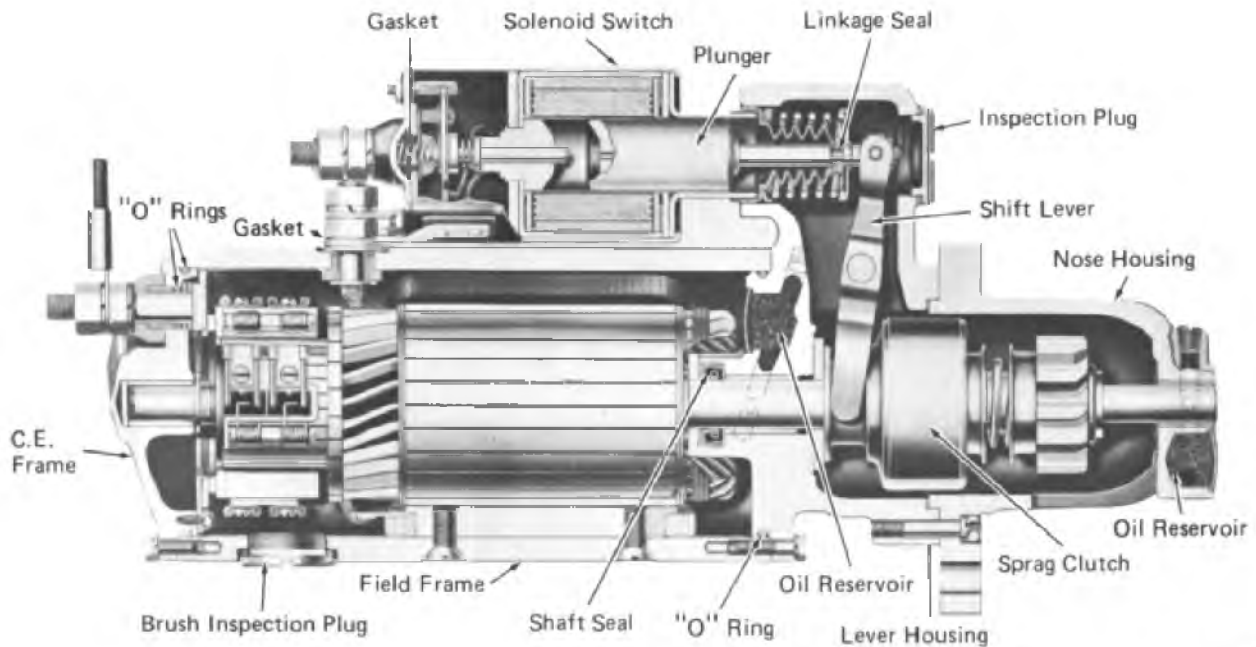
Typical Electric Starting Motor, Cross-Section
